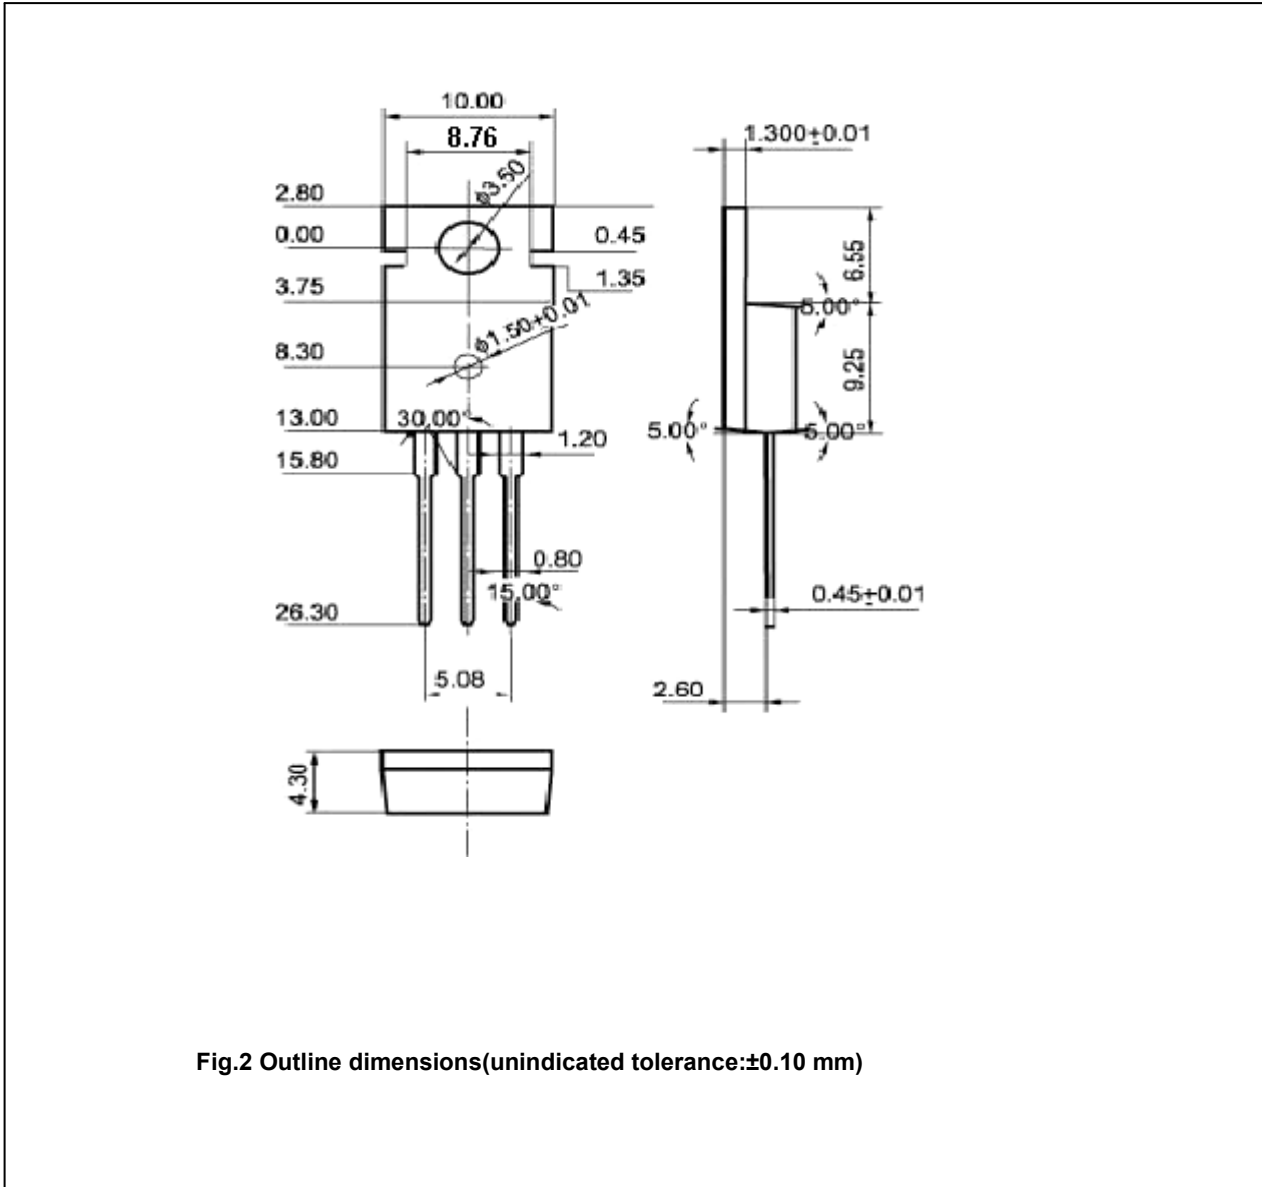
Outline dimensions(unindicated tolerance: ± 0.10 mm)
